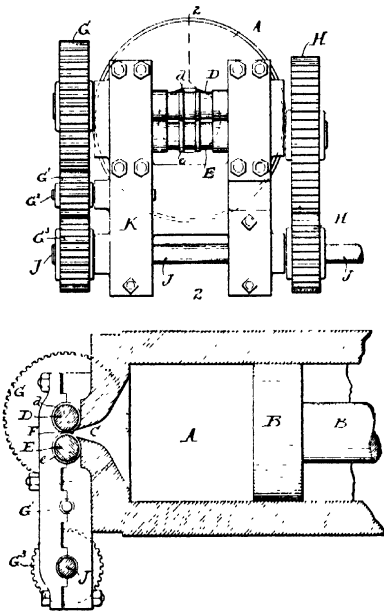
The du Pont Apparatus for the Manufacture of Explosive Powder in Strips.
